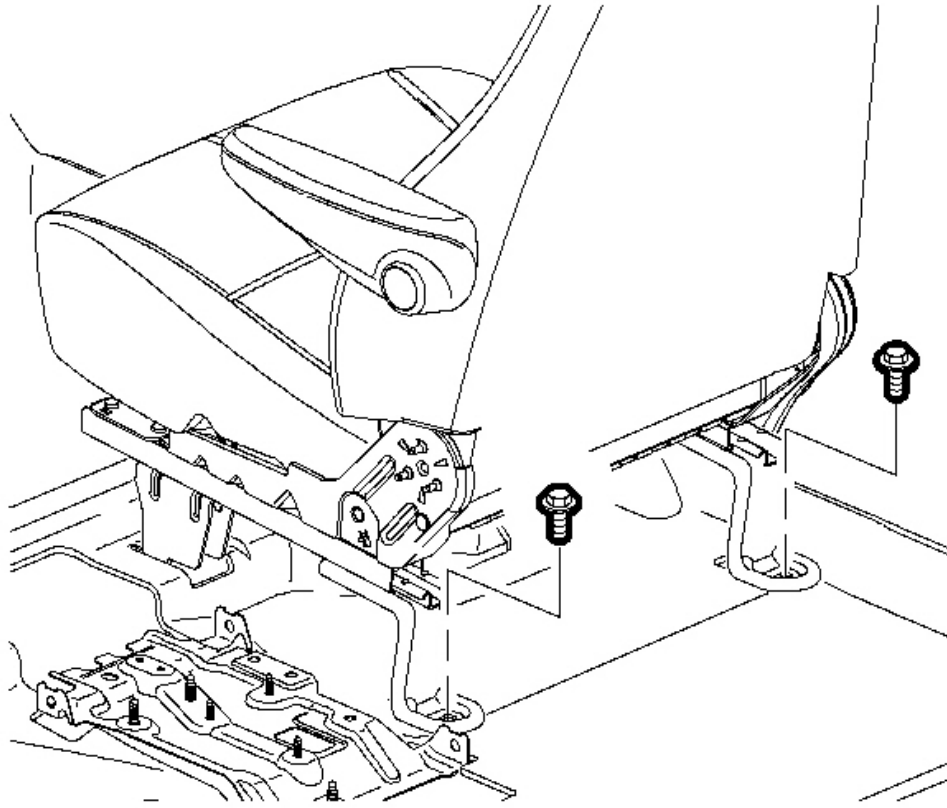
Removing/Installing Front Seat Adjuster Bolts
